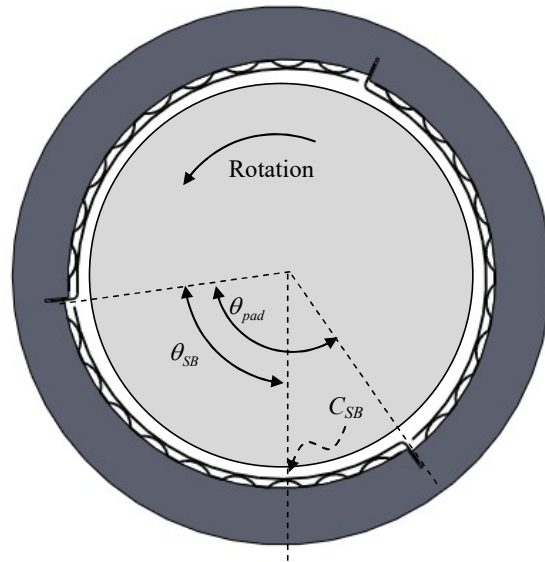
Three pad bearing with the angular span and the angular position of minimum film thickness
